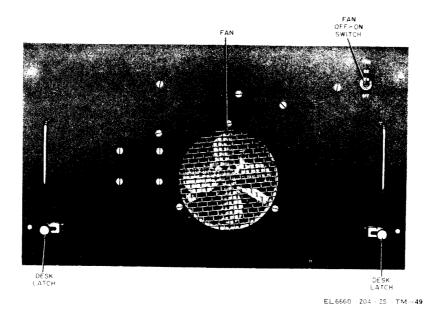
Electrical Equipment Cabinet Subassembly MX-1482/TMQ-5, front view.
